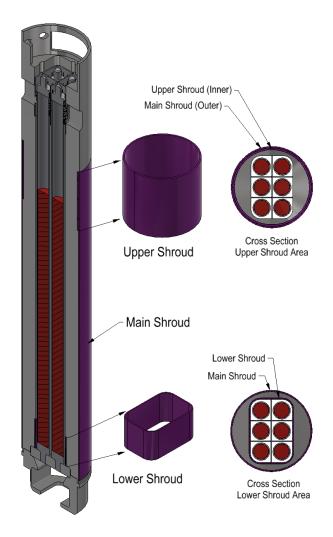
Cross-sectional views of holder including six rodlets (red) and three shroud components (purple).
